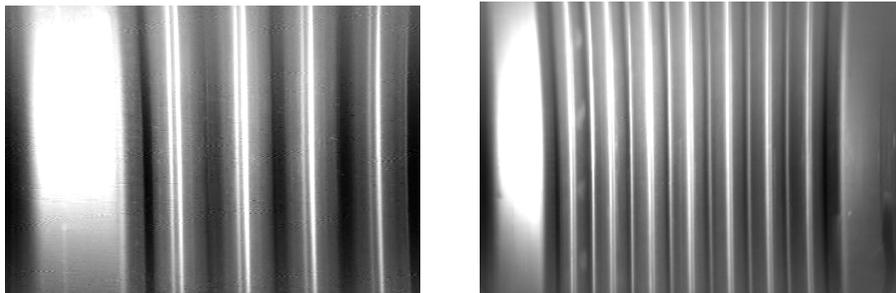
Half-face (left) and full-face (right) visual inspection
